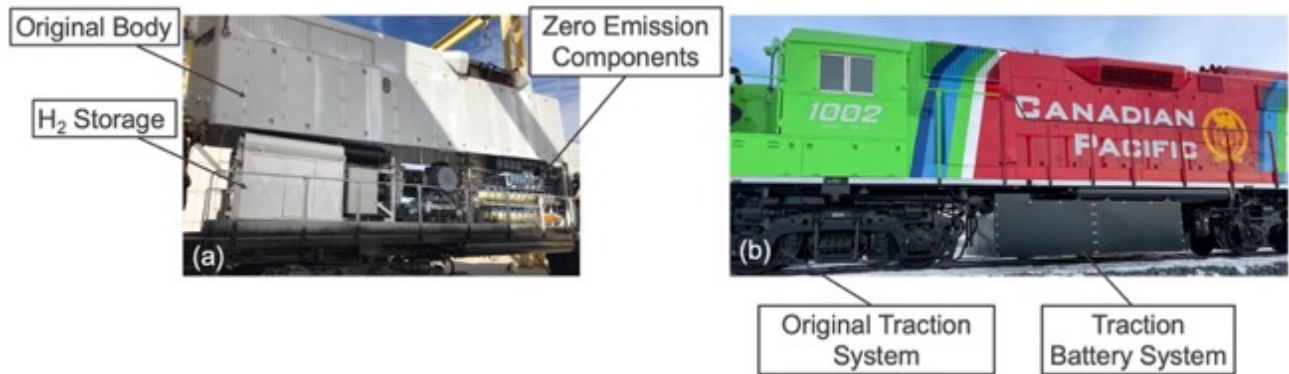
(a) Pre-made zero emission component assemblies installed on the locomotive platform as “skids” with the original locomotive body being installed over top and the completed locomotive platform (b) once final assembly has been completed.
